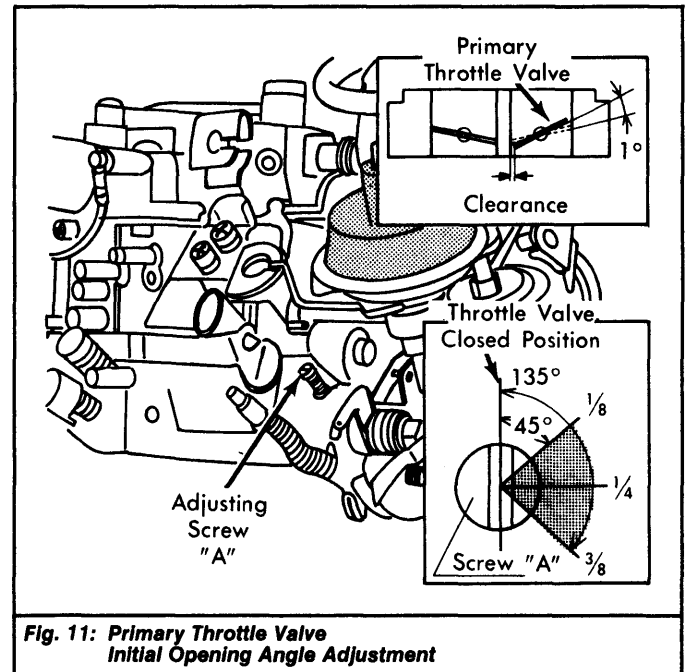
Primary Throttle Valve Initial Opening Angle Adjustment
